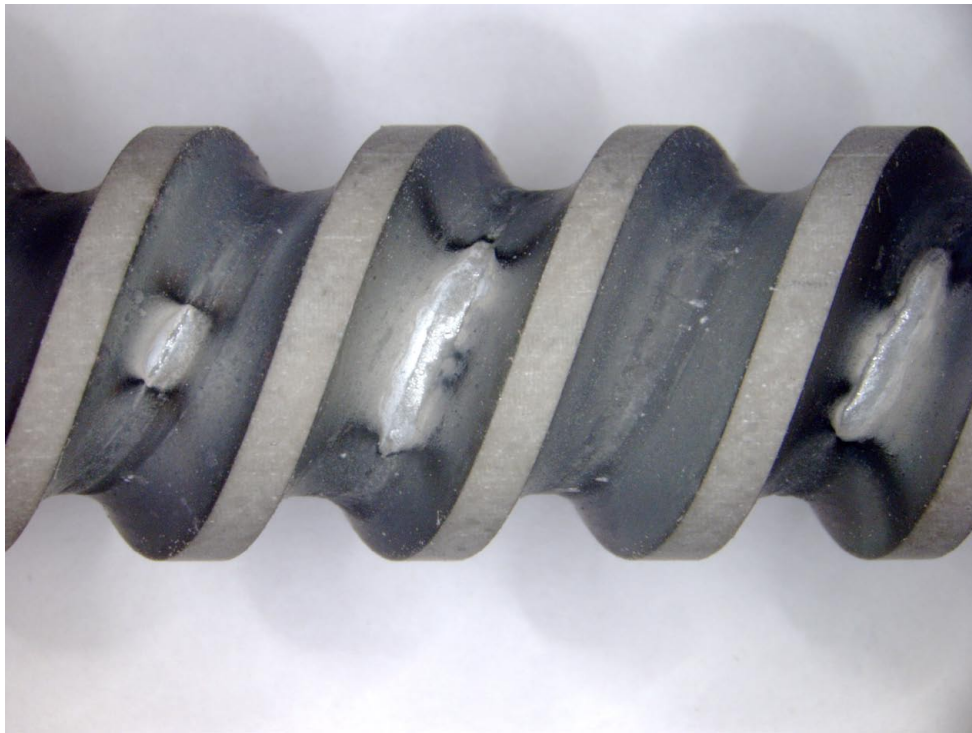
Surface condition of the alumina insulator, after testing, with the Ta wire removed.
